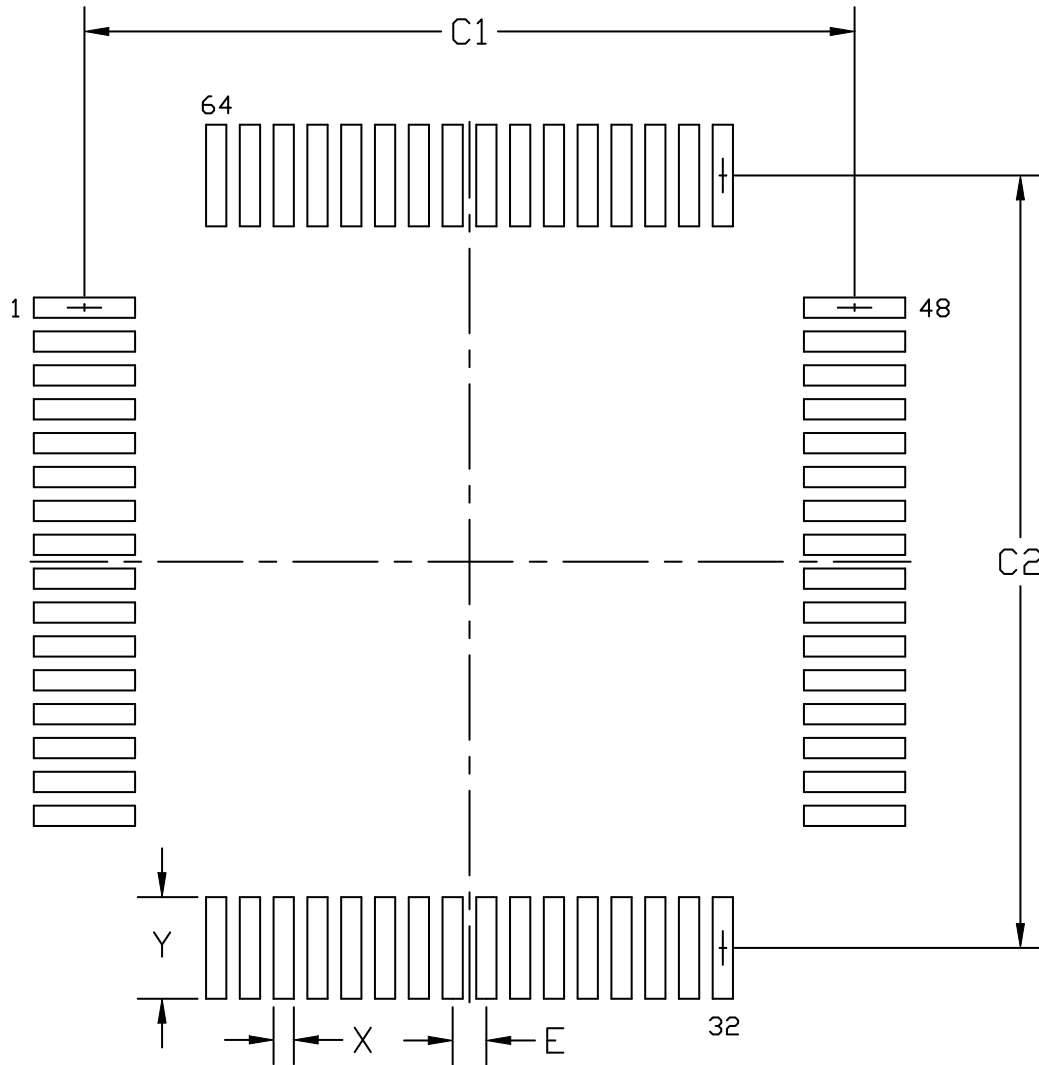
TQFP64 PCB Land Pattern Drawing
